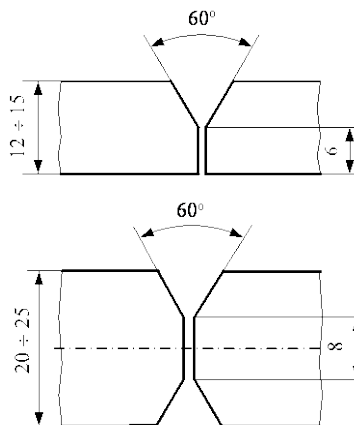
Two-run butt weld test assemblies
